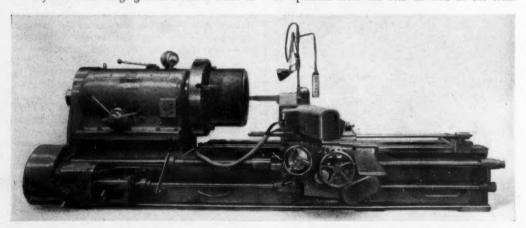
Denham 20%-in. centre heavy-duty profiling lathe for marine engine piston heads
